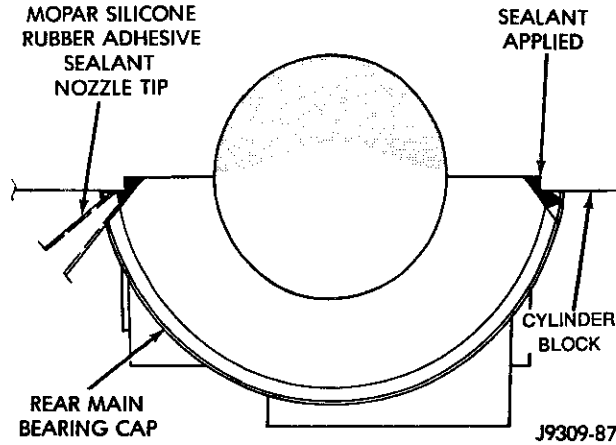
Apply Sealant to Bearing Cap-to-Block Joint
